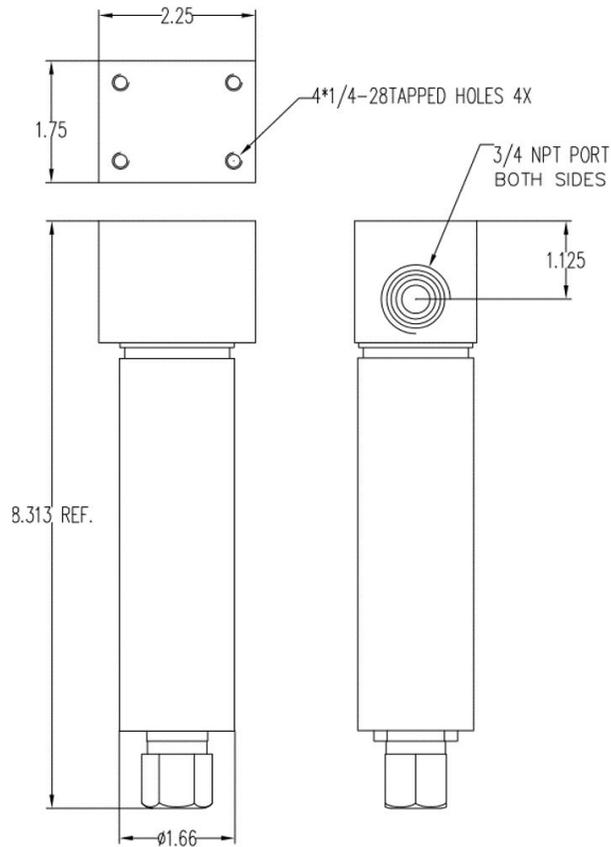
Dimension of the HM-500SS/510SS/520SS (inch)
